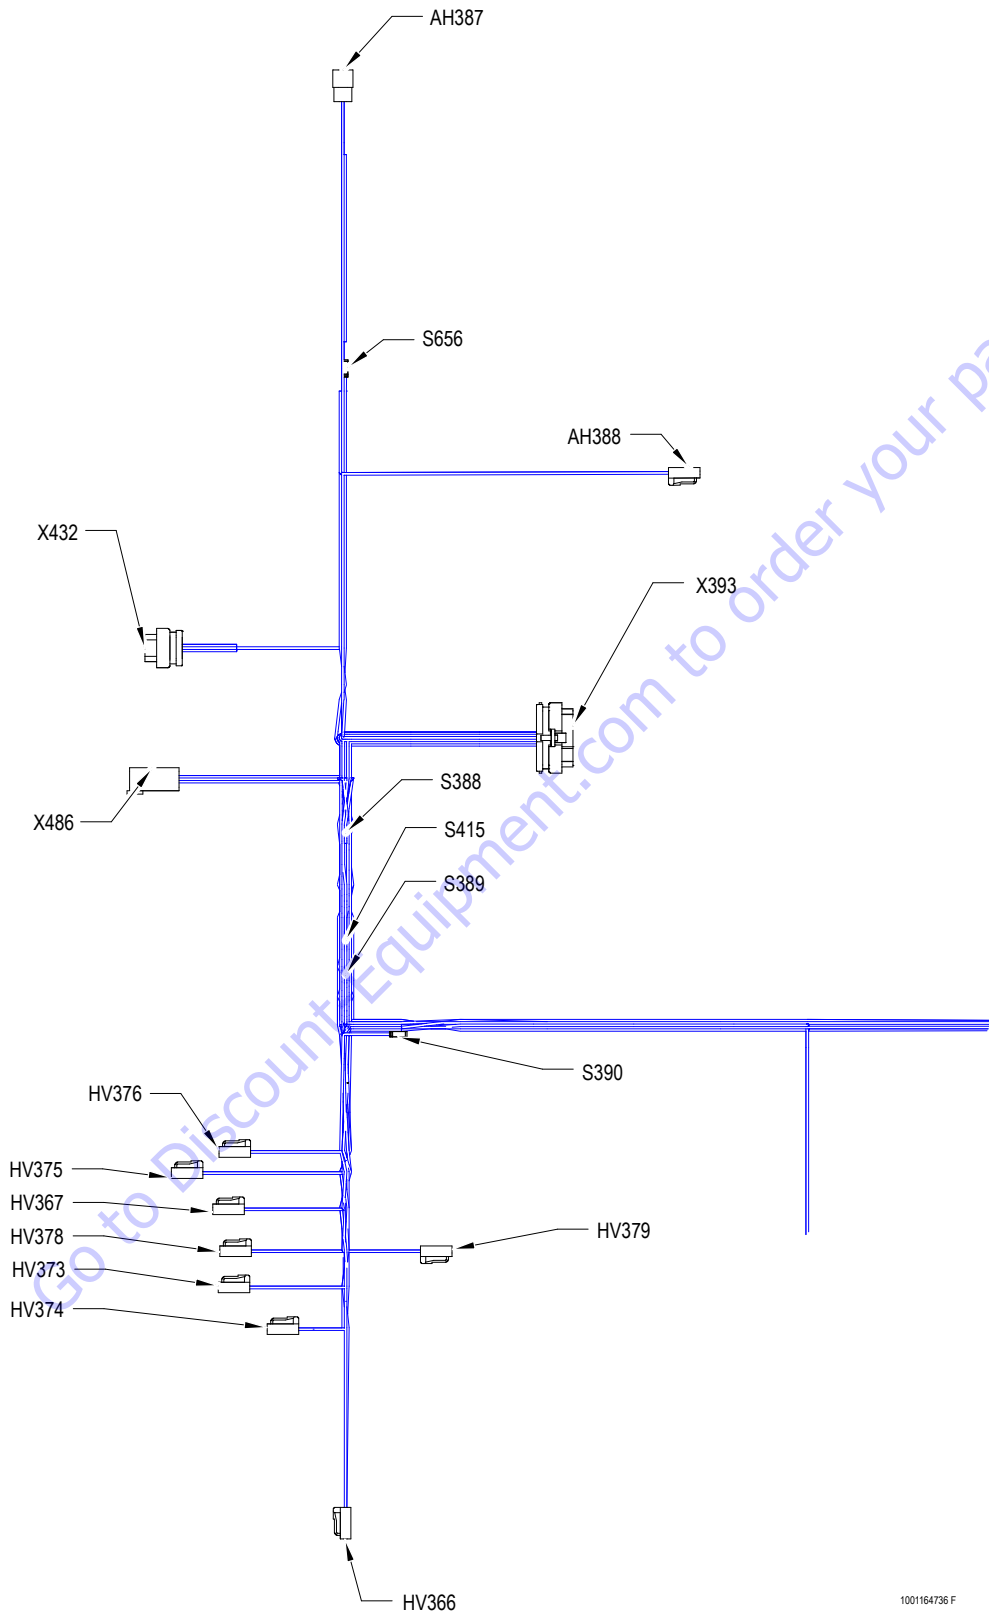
Main Valve Harness - Sheet 2 of 8
